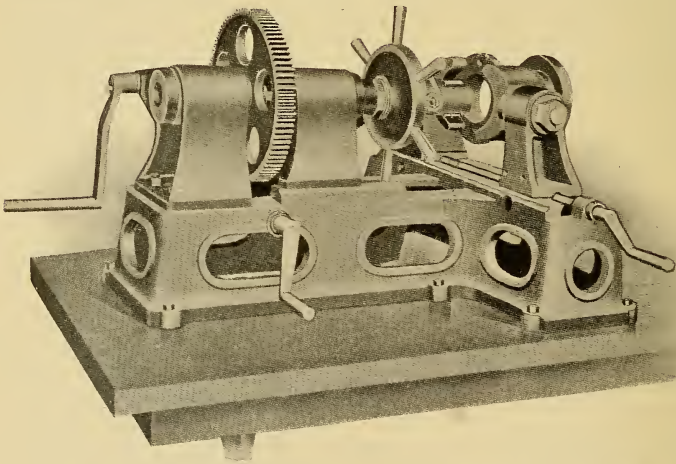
THE FIRST MACHINE BUILT FOR EXPANDING PIPES INTO FLANGES
